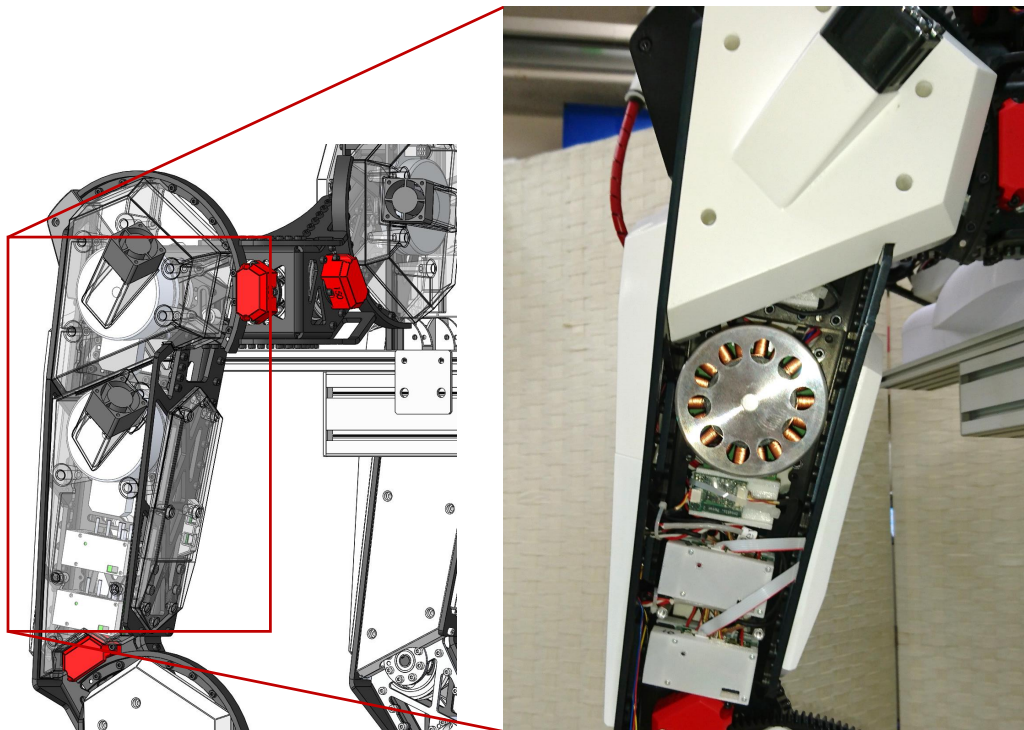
Assembled and mounted motor overview (EC 90 flat 260W)
